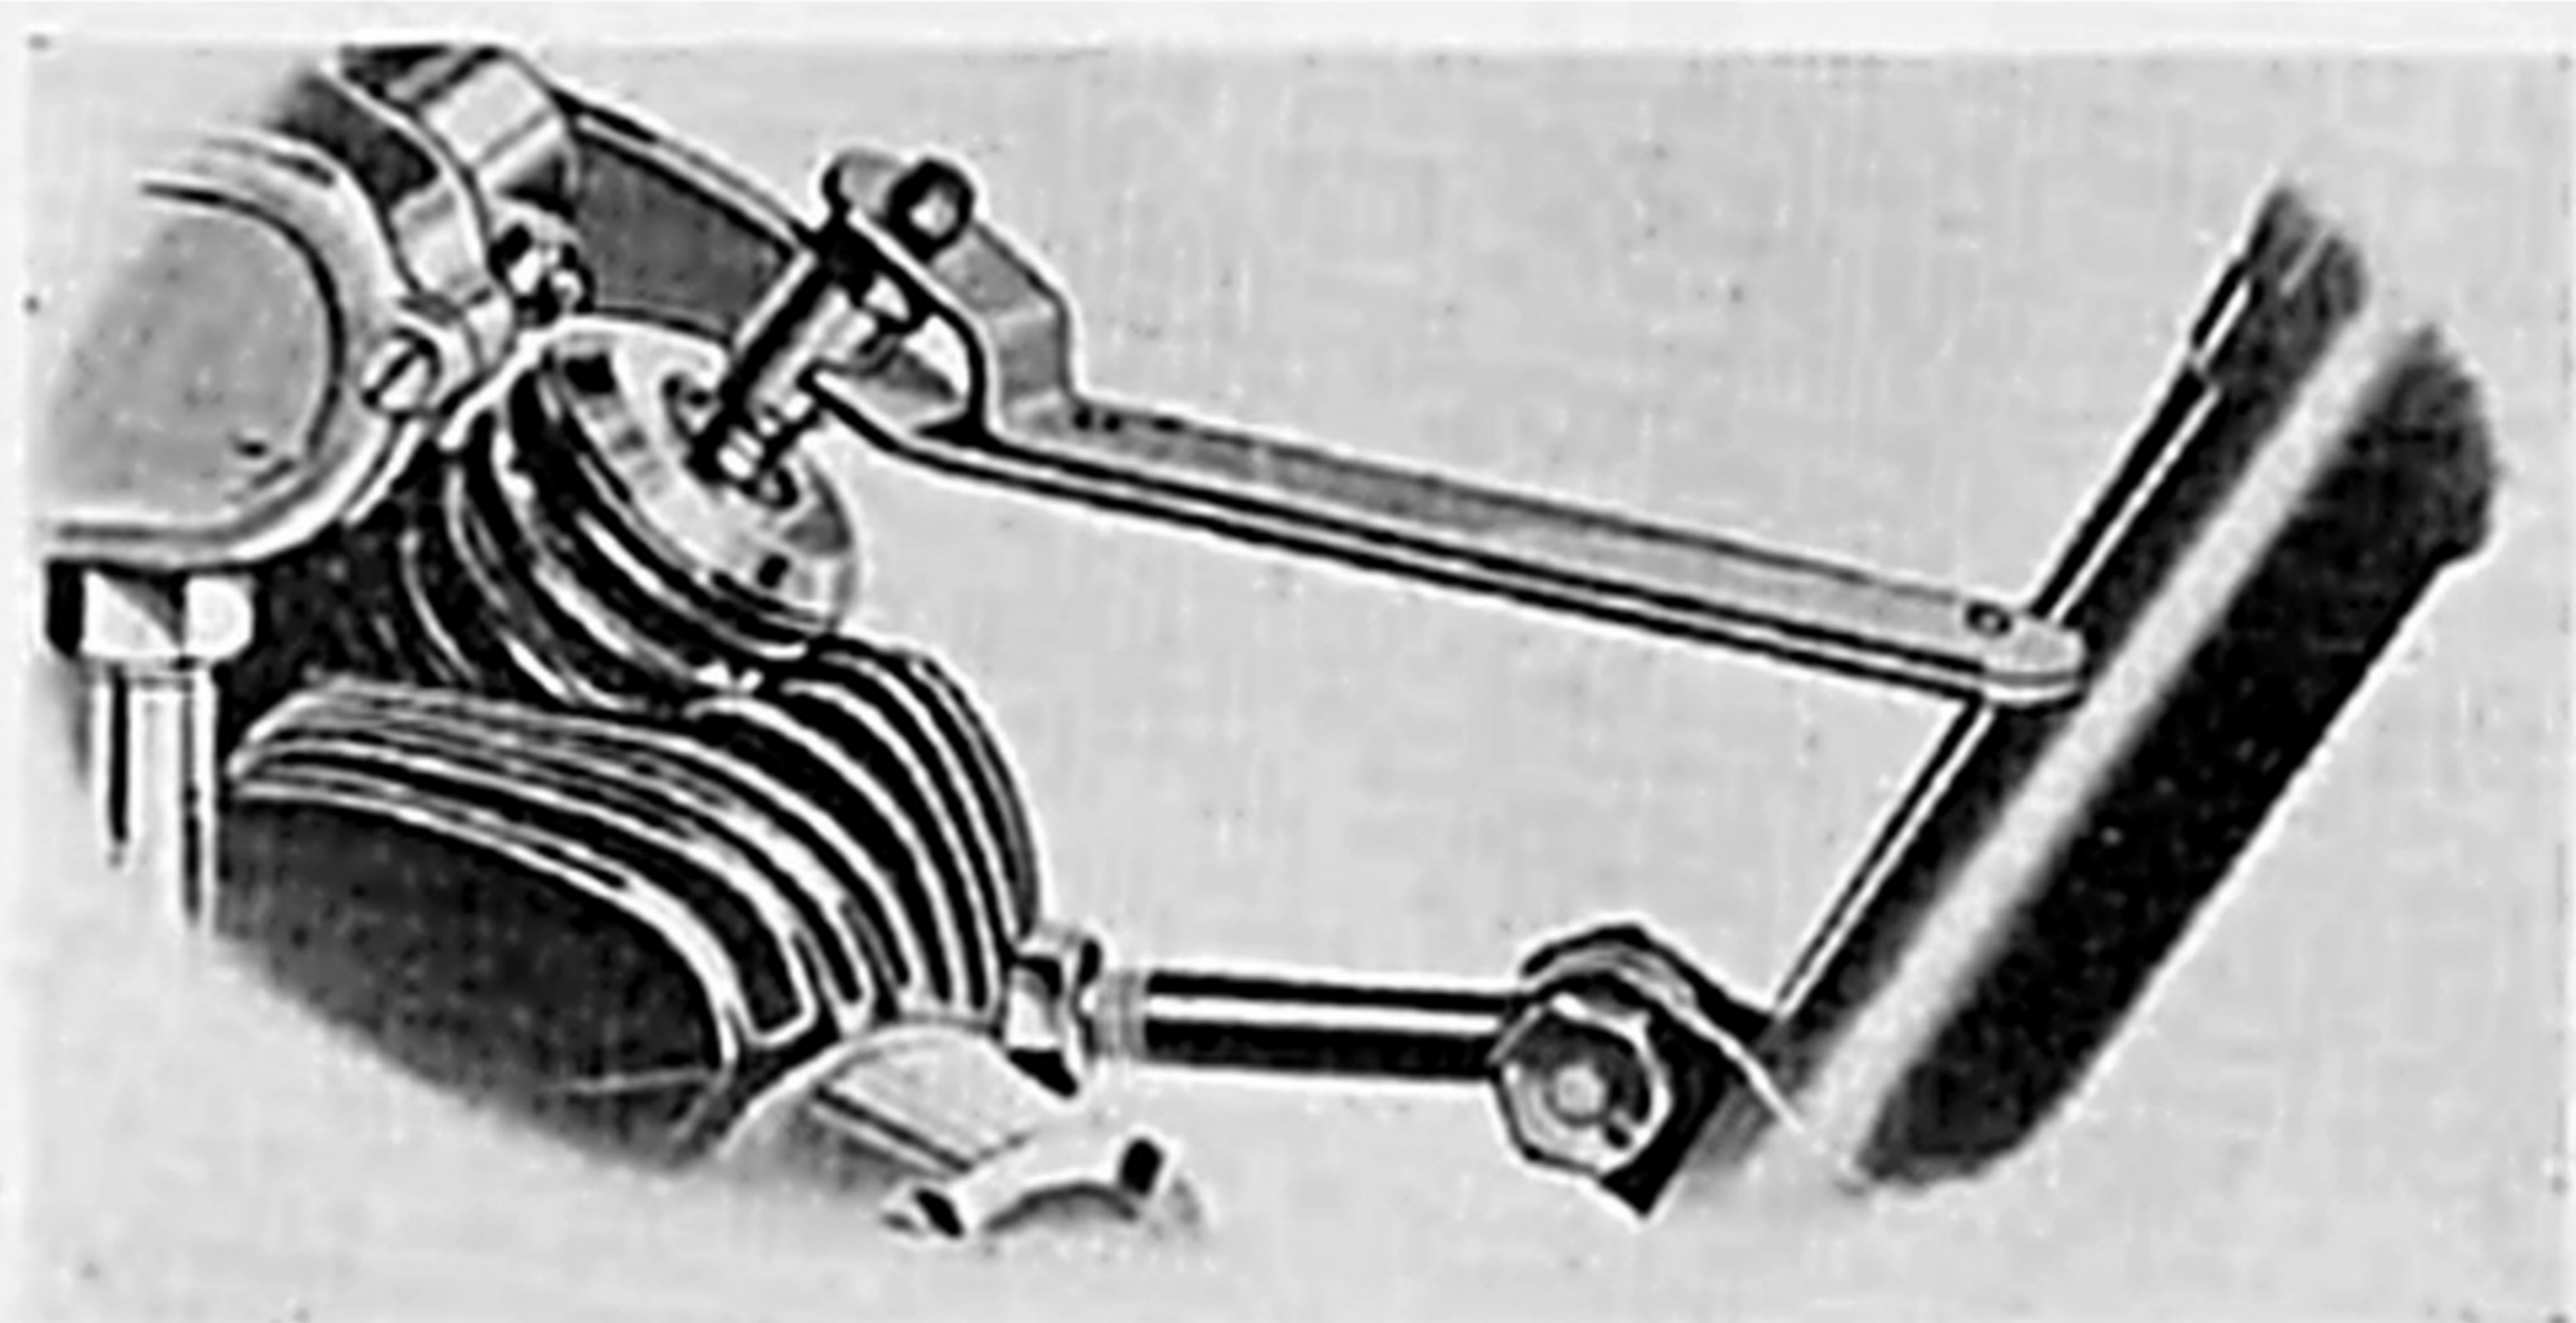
THE A.J.S. TAPPET TUBE EXTRACTOR
